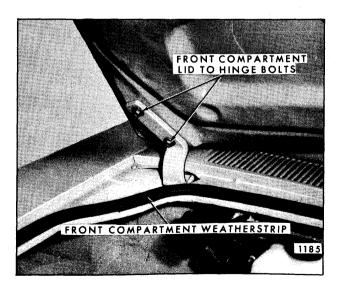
Front Compartment Weatherstrip And Front Compartment Lid Attaching Bolts
